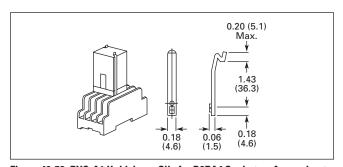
PYC-A1 Hold down Clip for D2PA4 Socket — Approximate Dimensions in Inches (mm)
